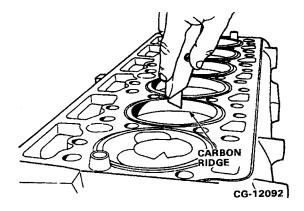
Remove the Carbon Ridge from the Top of Each Cylinder Sleeve
